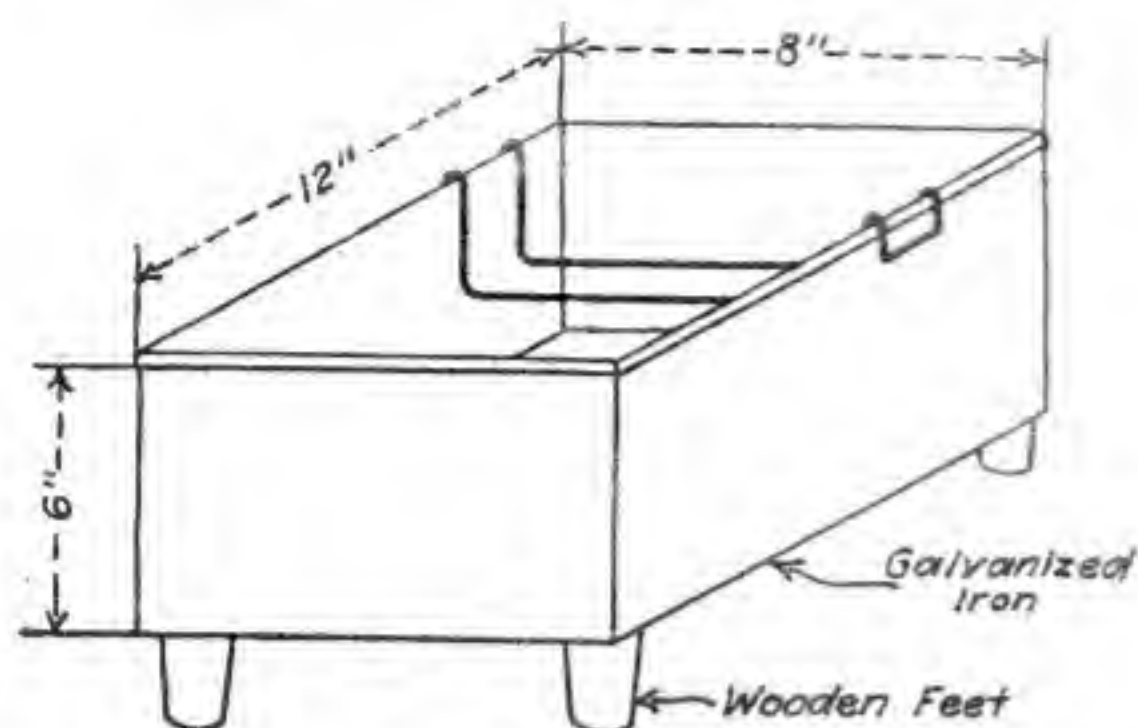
Dimensions of a Small Pneumatic Trough.
